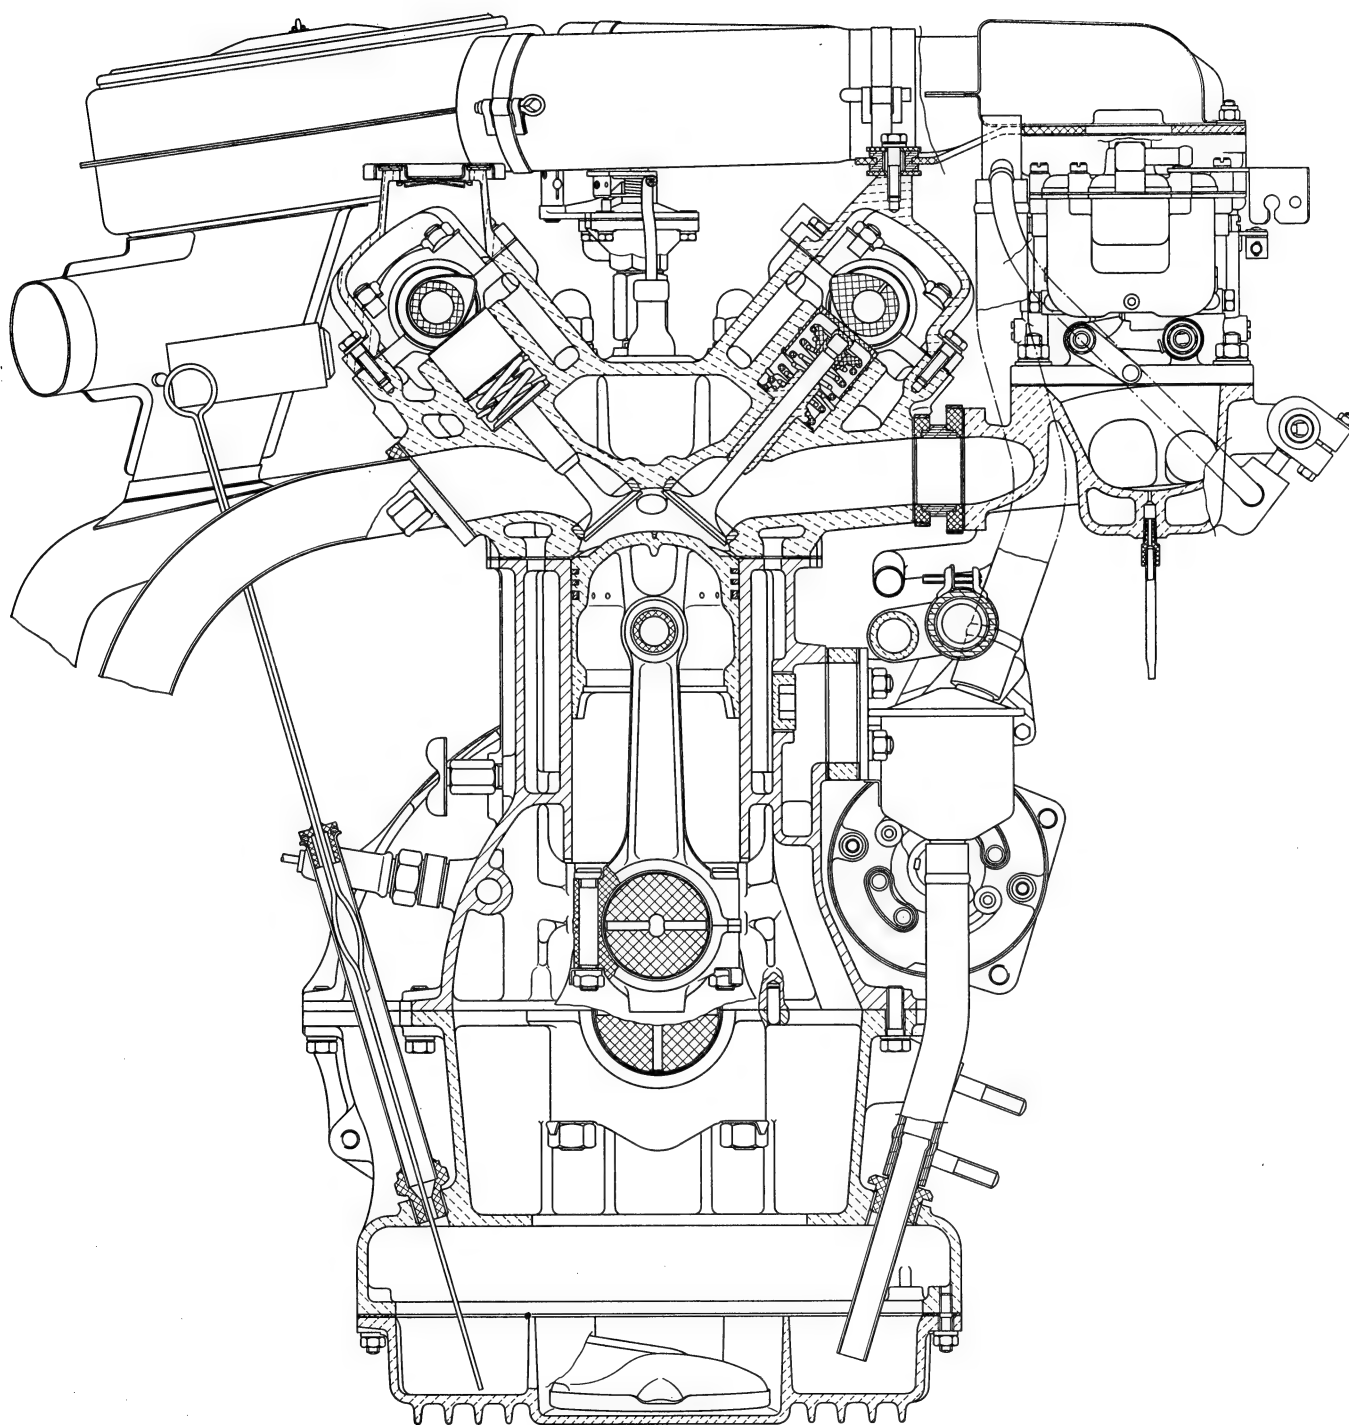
End sectional view of engine 118 B.000 across connecting rod, piston and valves.
